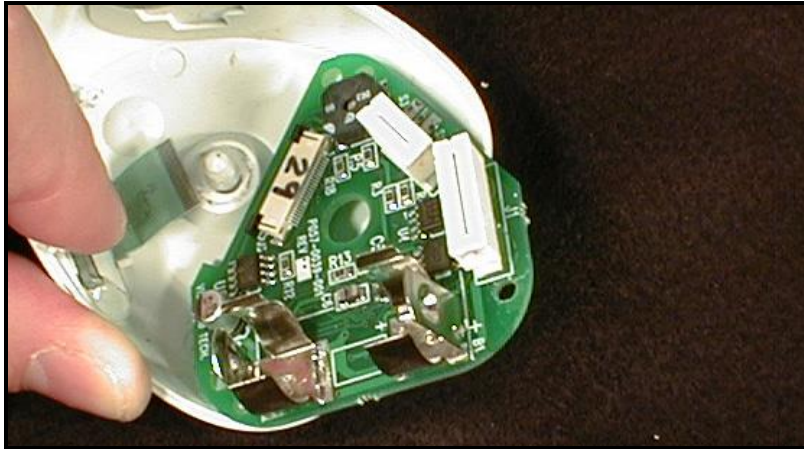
Sliding the Display Flex Cable from the PCB connector
